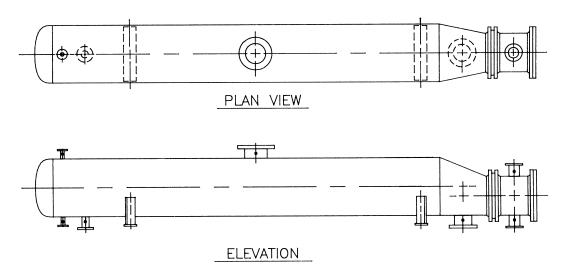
Plan and elevation views of a kettle-type reboiler.
